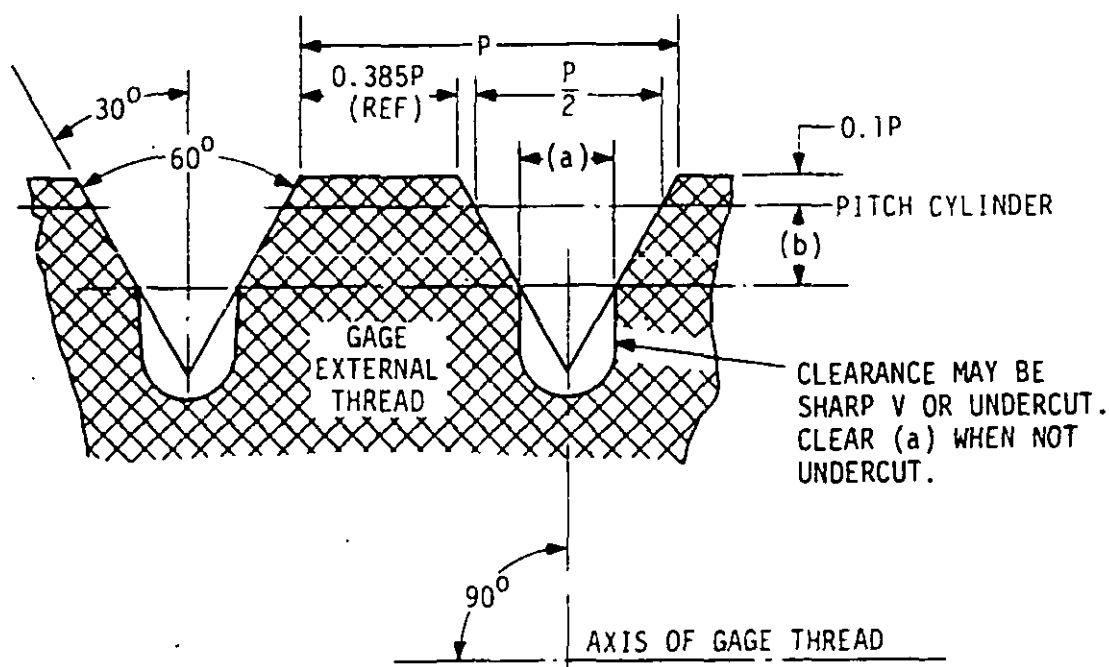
B.4 External thread profile with truncated flanks for thread gages
